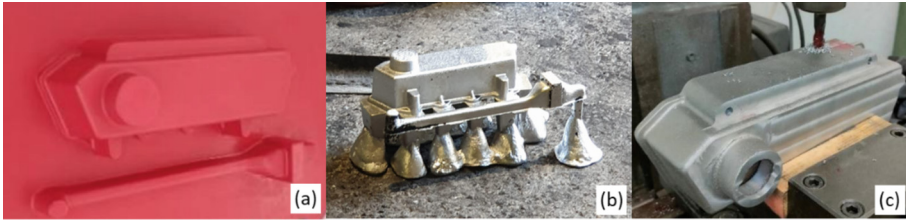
Output of the physical manufacturing phase: (a) epoxy resin pattern; (b) cast part after mould extraction; (c) machining operations.
